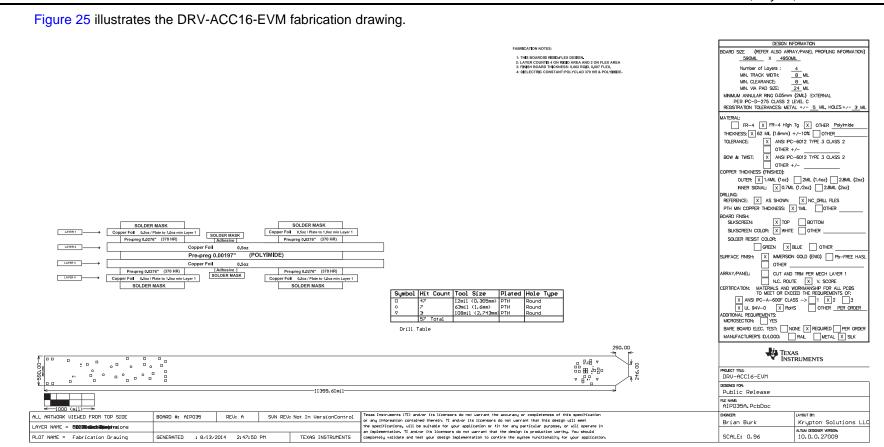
DRV-ACC16-EVM Fabrication Drawing
